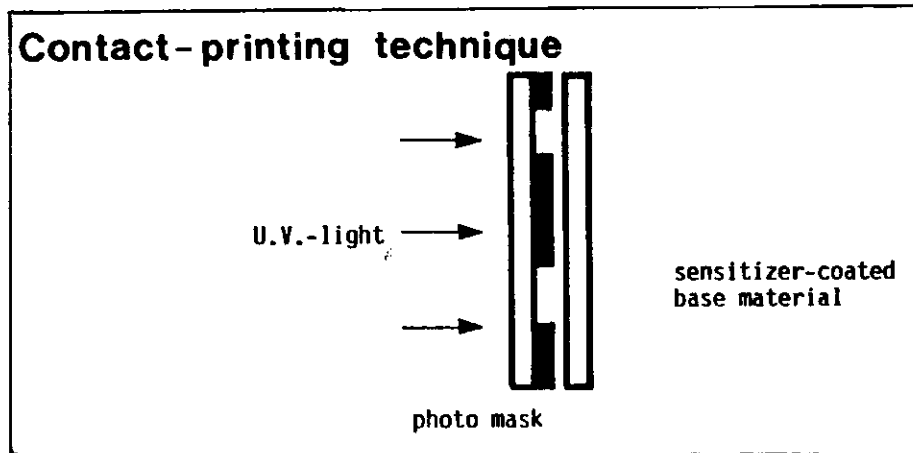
Contact-printing Technique in PCB Manufacturing
